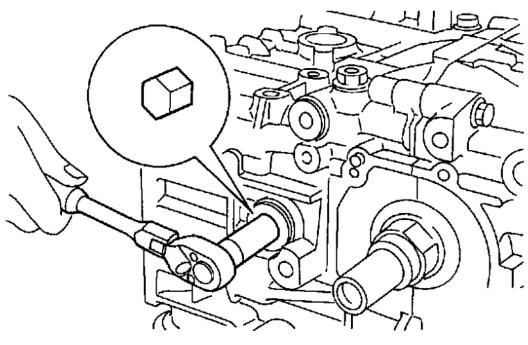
Installing Service Hole Plug & Gasket Courtesy of SUBARU OF AMERICA, INC.
